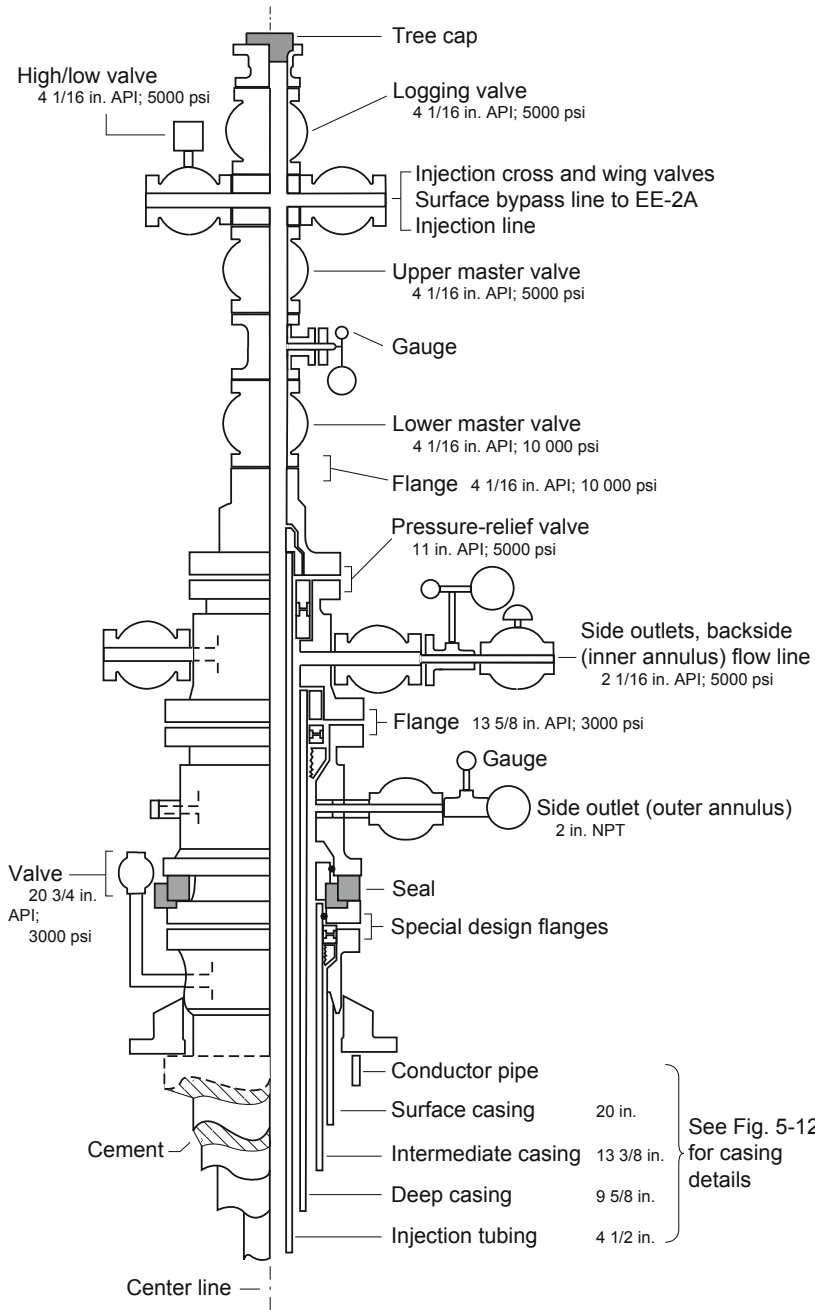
High-pressure injection wellhead assembly (Well EE-3A). Left: exterior view; right: cutaway view. Based on an HDR Project drawing by D. S. Dreesen, 1992
